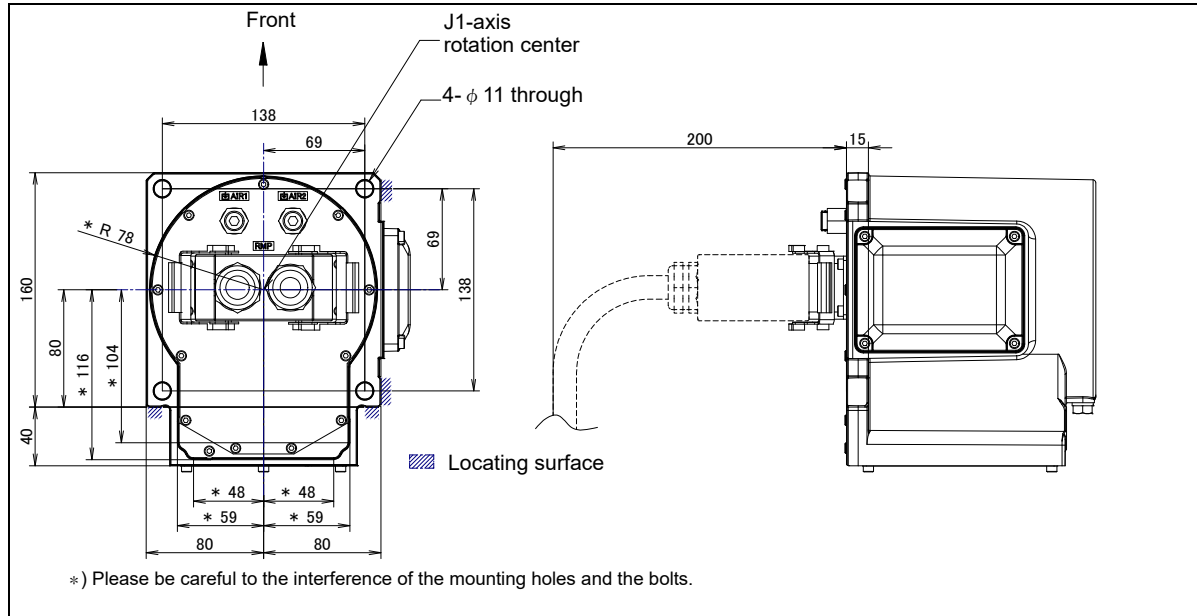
(b) Dimensions of the robot base (bottom side connector plate)
